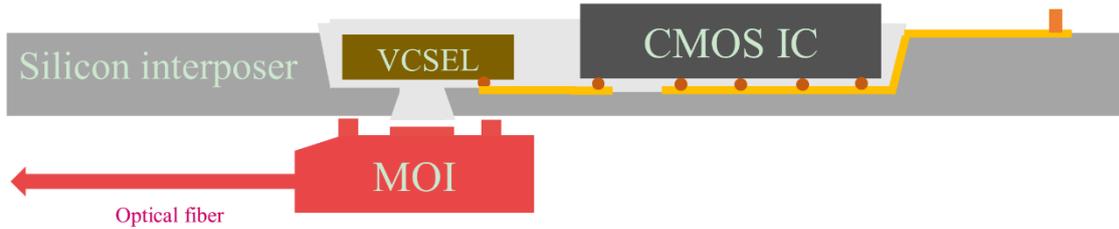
scheme of assembly CMOS driver, VCSEL, MOI
